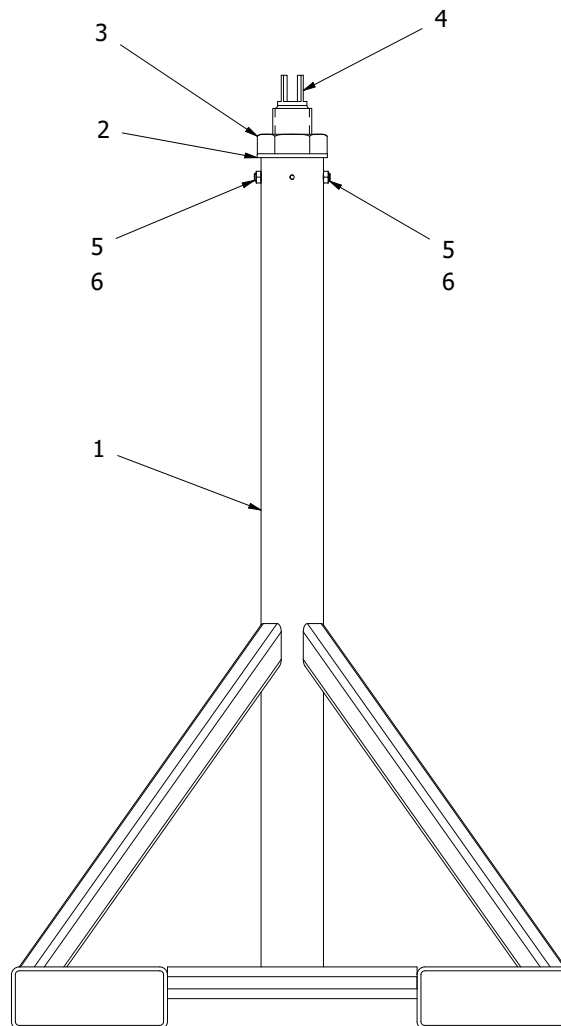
Pedestal Assembly, 55 7/8" Height
